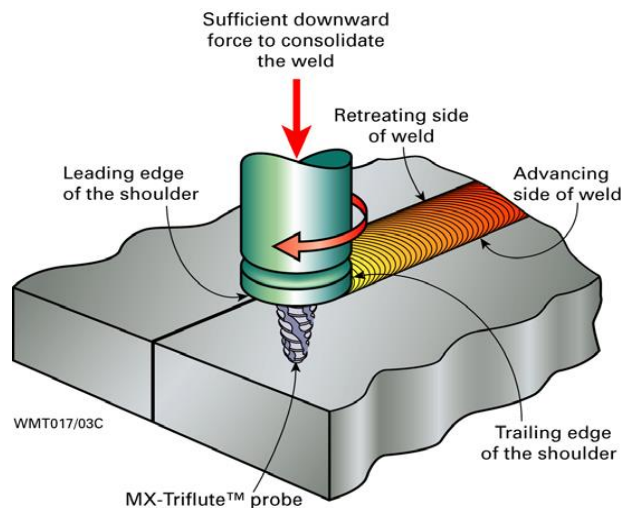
Schematic of friction stir welding process [2]
